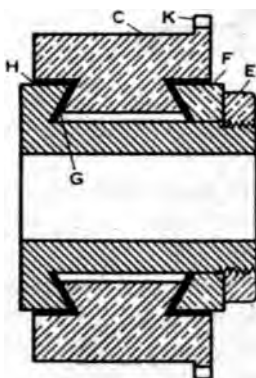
Sectional view of commutator showing shape and arrangements of segments and insulating material.
